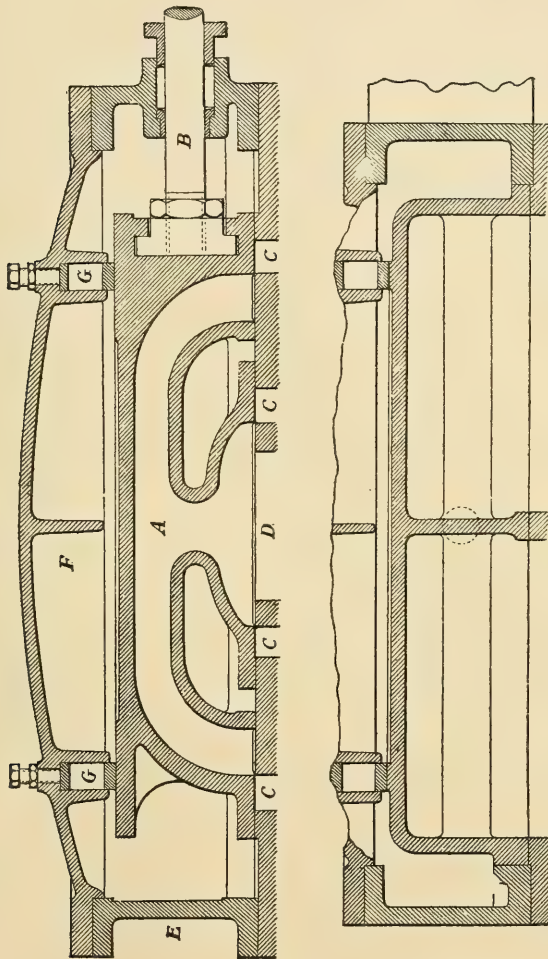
Slide Valve, with T nut for Rod, and Packing Rings recessed in the Valve-casing Cover.
